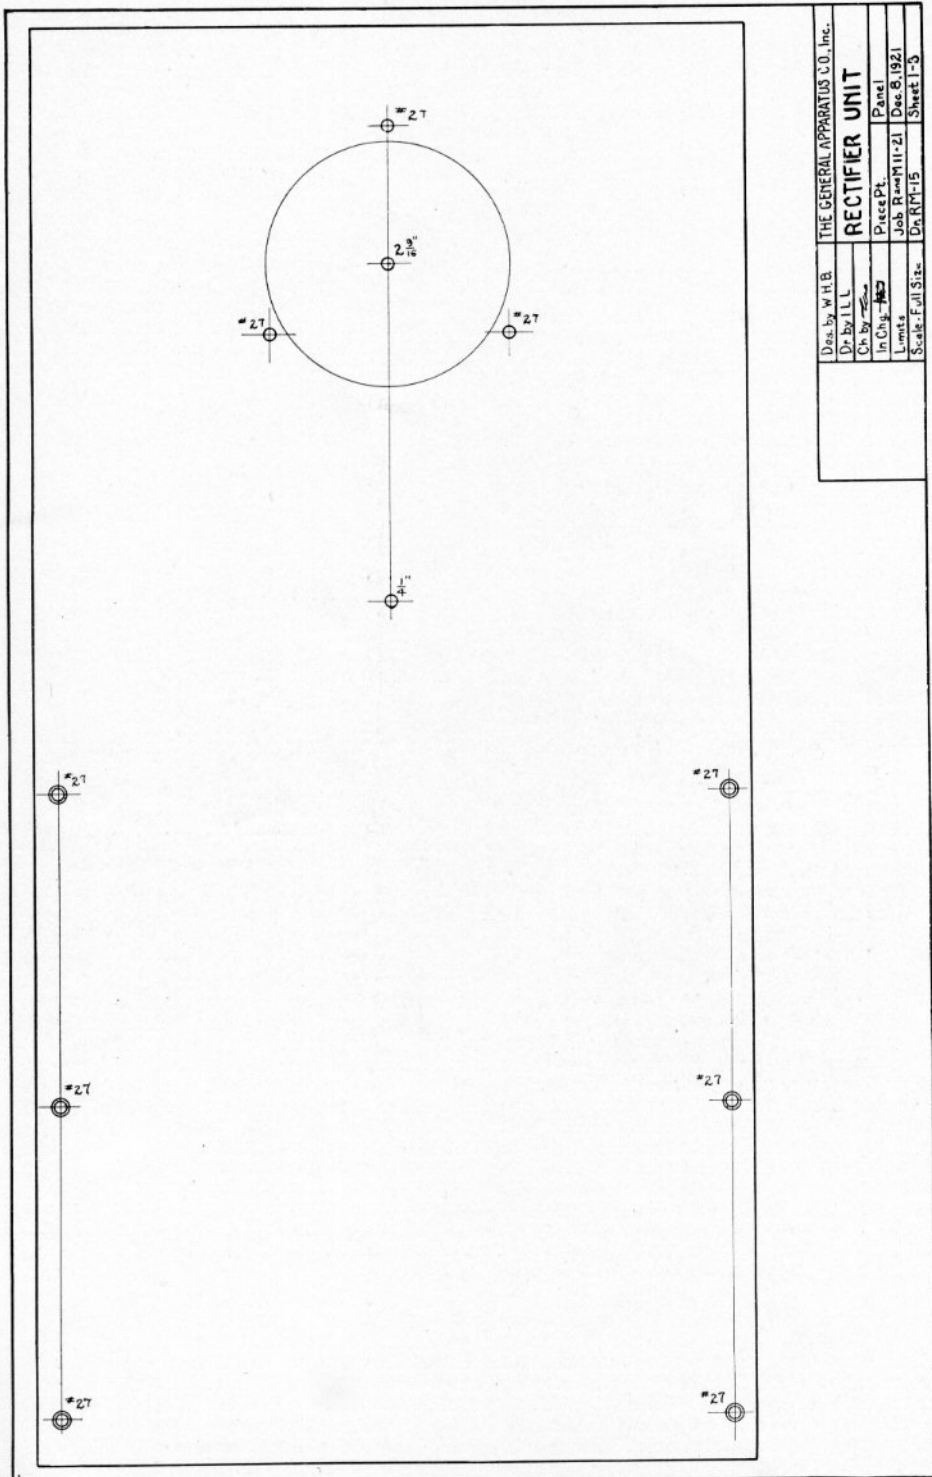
Scale drawing of the front panel, reduced to one half size.
